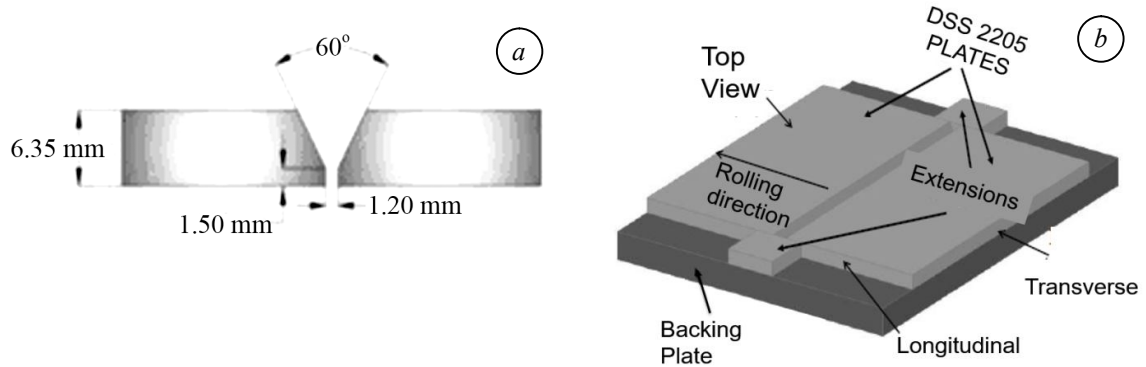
Schematic diagram of welding joint configuration Single V-Groove (a) and isometric view (b) [4].
